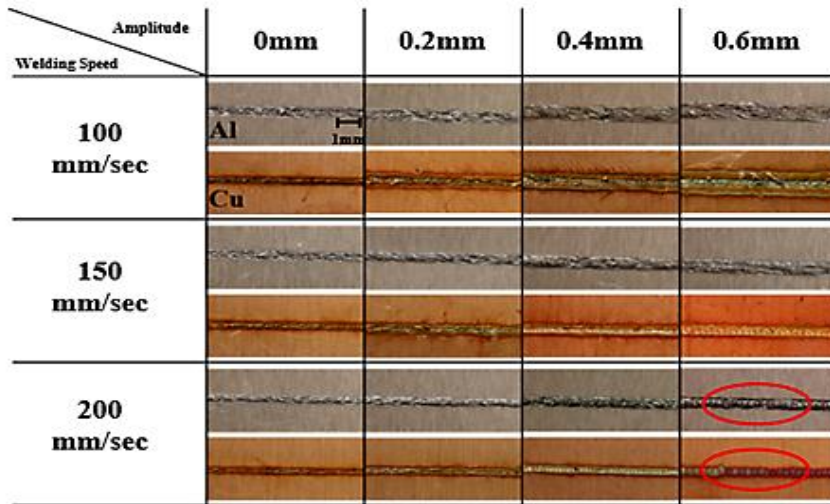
Bead profiles analysis of welded joint with various welding speeds 100~200mm/sec; bead appearance
